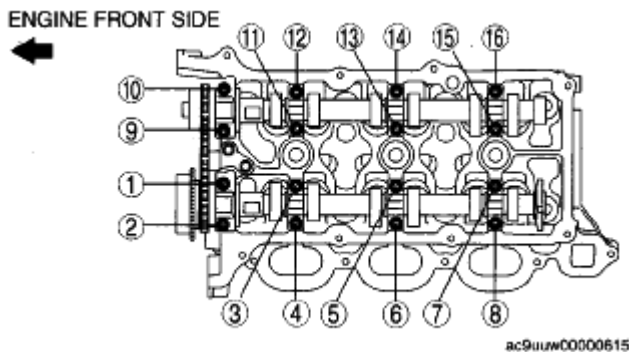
Positioning Camshaft Component (RH) Onto Cylinder Head
